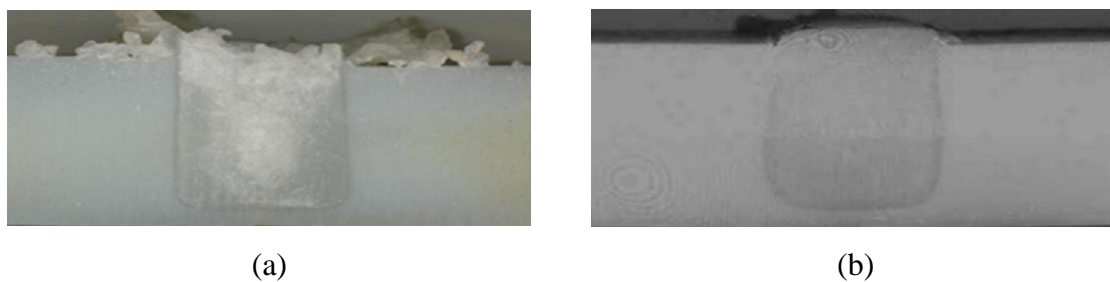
Cross section of the welds produced with a left hand threaded pin with: (a) clockwise direction and (b) counterclockwise direction, adapted from [80].
